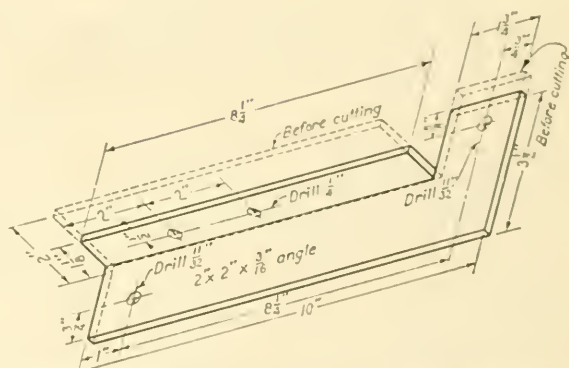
Upper front throat spring bracket, Case-Osborne corn binder
